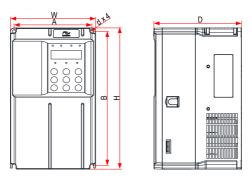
Mounting Dimensions of MD500ET0.4GB to MD500ET15GB
